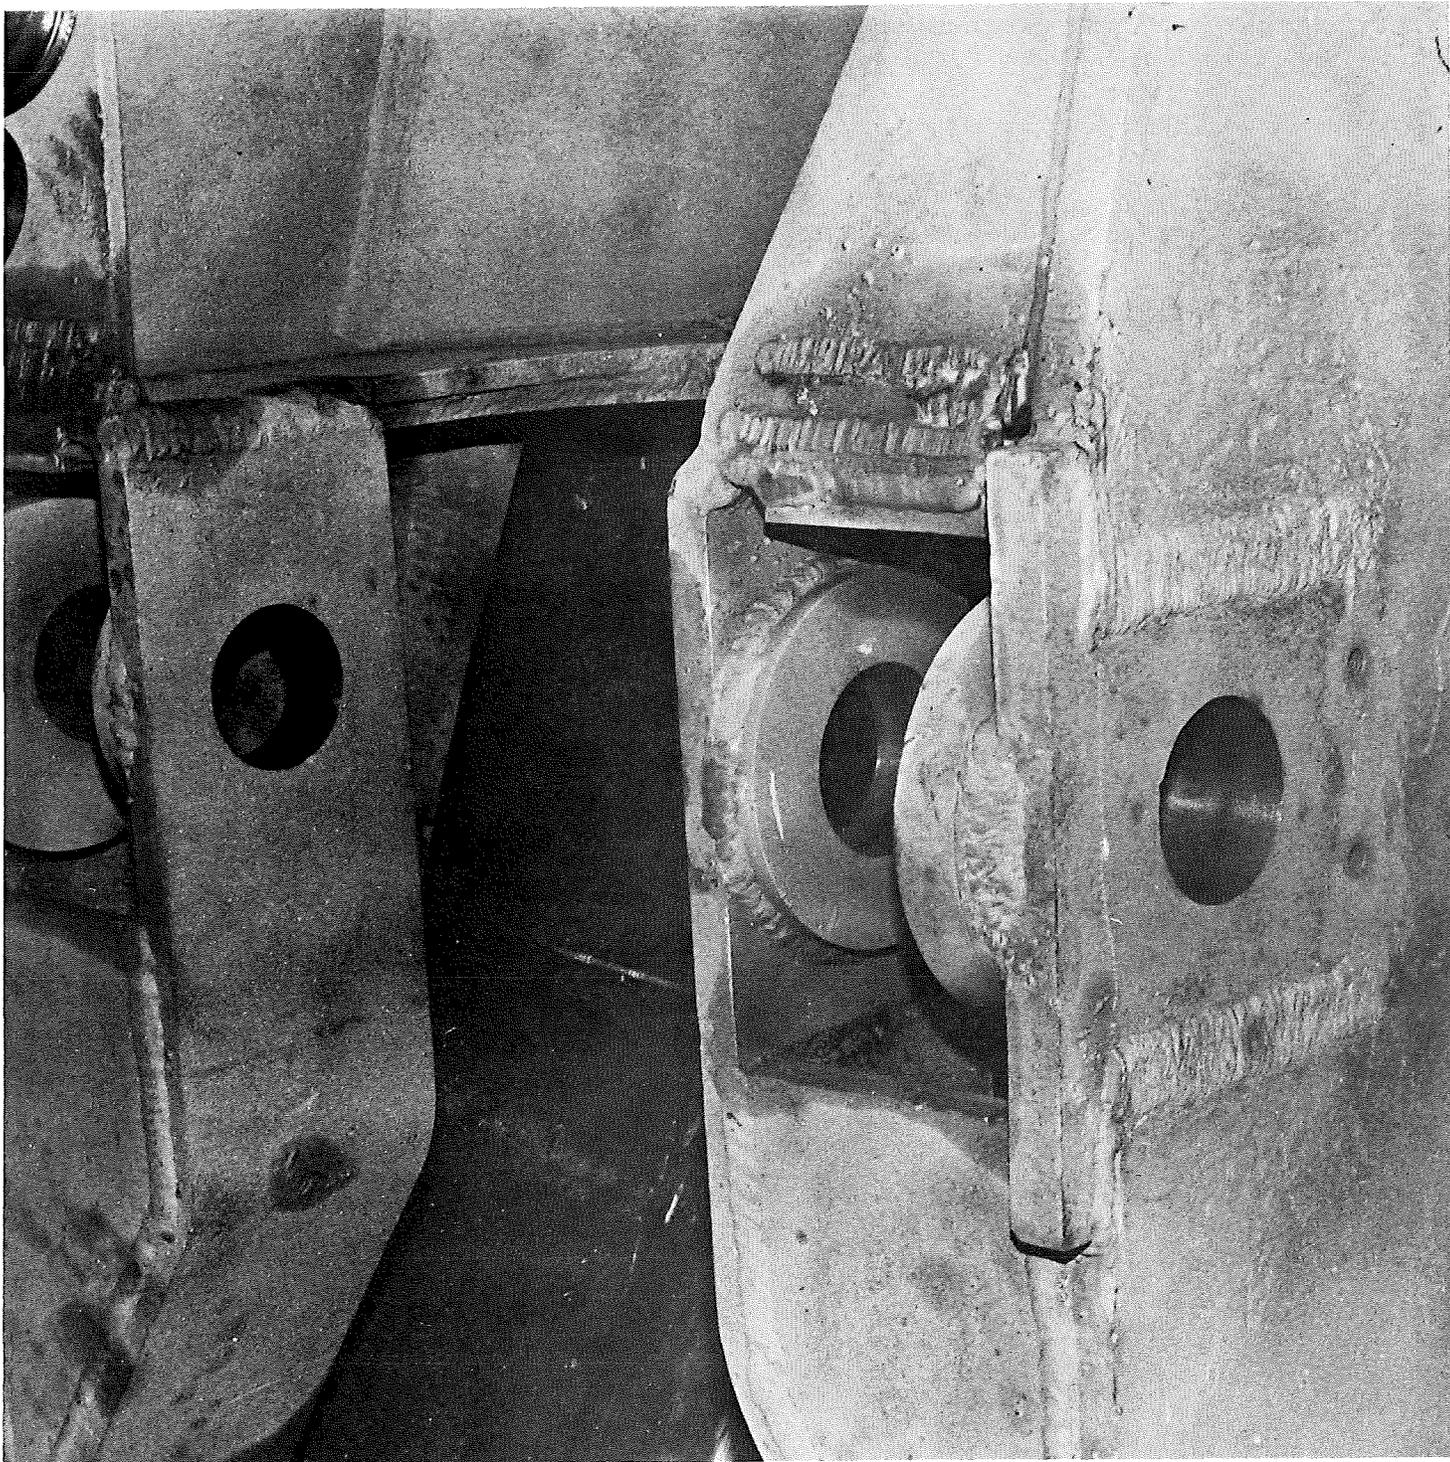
Weld repair of a bushing on a mining bucket. Excellent alignment and fitting are required.
